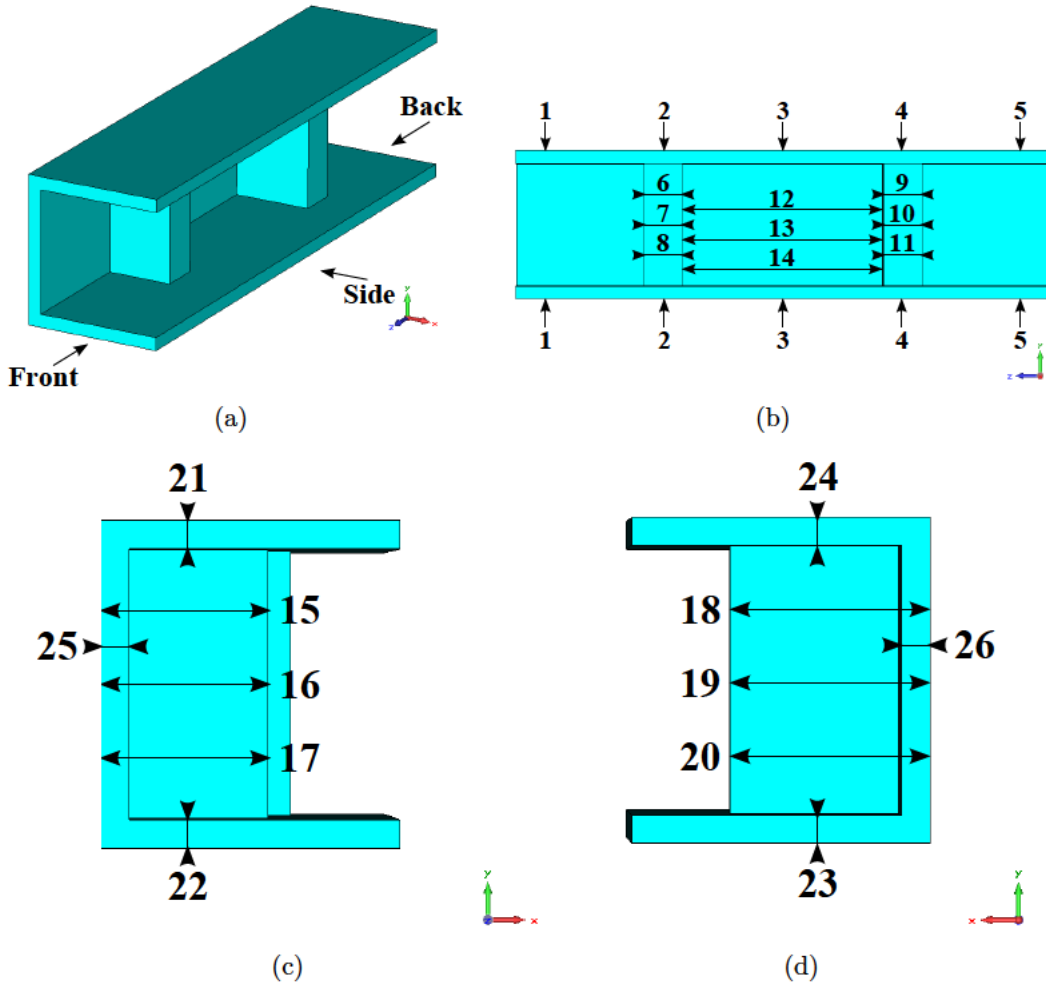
Samples views and measurements: (a) perspective view, (b) side view, (c) front view, and (d) back view.
